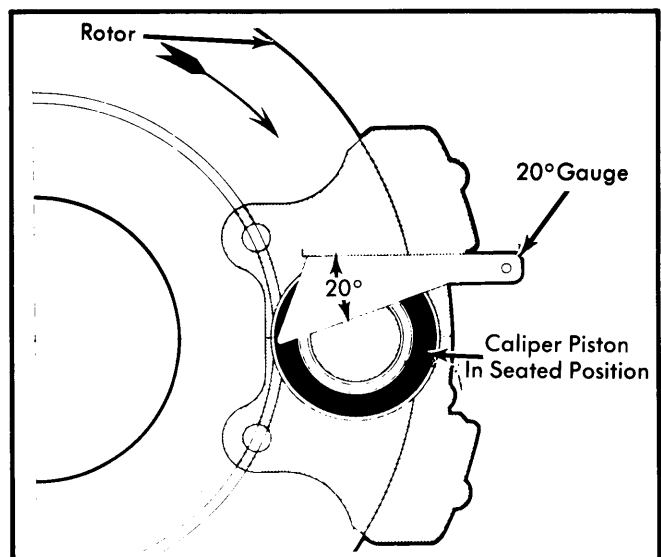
Using a 20° Gauge to Position Piston in ATE Caliper Bore (Except Vanagon)
